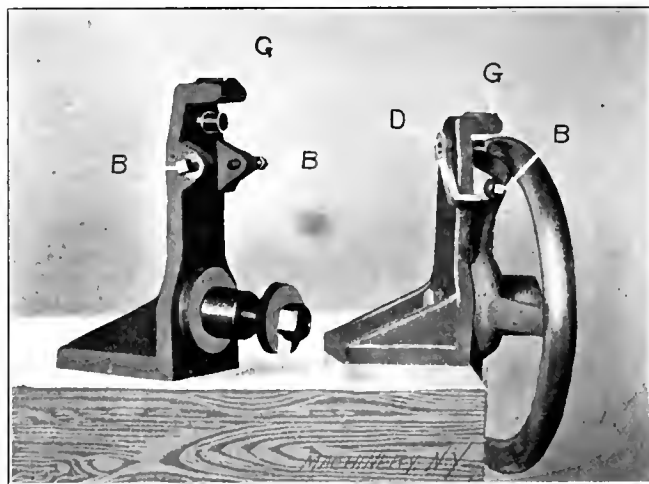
Drill Jig for Holes in Rim of Hand-wheel.
